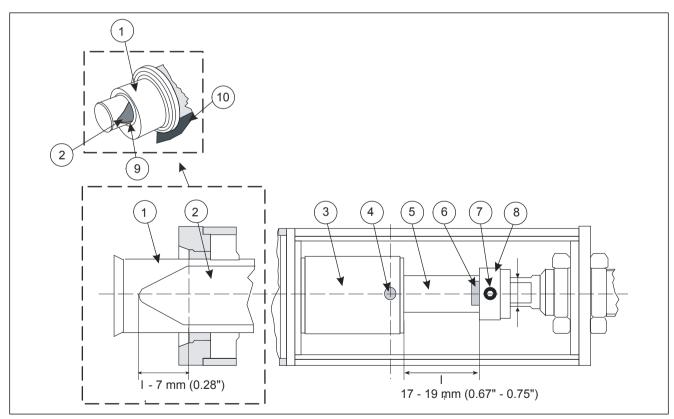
Adjusting sample flow rate, and positioning the sample inlet opening: 1 - closing piston, 2 - flow inlet opening, 3 - sample flow rate regulator nut, 4 - hole for regulator nut (4 pcs), 5 - piston shaft, 6 - flat surface that indicates the position of flow inlet opening, 7 - locking screw, 8 - piston rotation guard, 9 - cutting edge, 10 - sample outlet coupling.
